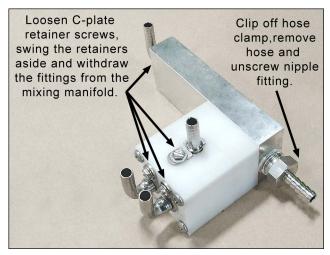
Mixing Manifold Hose Fittings Removal
